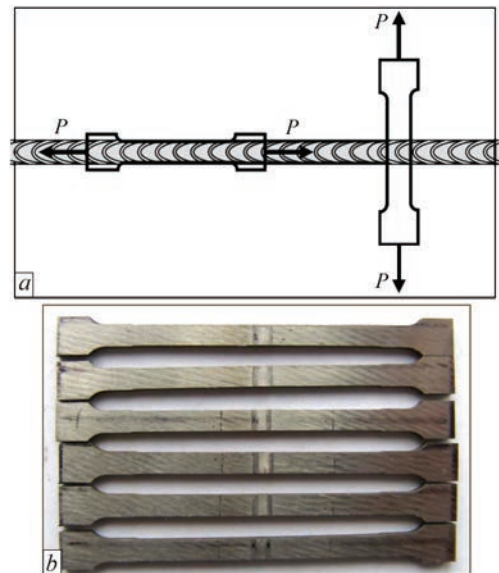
Scheme of cutting out tensile samples from welded joints of HTNA single-crystals and orientation of load P at testing (*a*) and general view of tensile samples (*b*)
